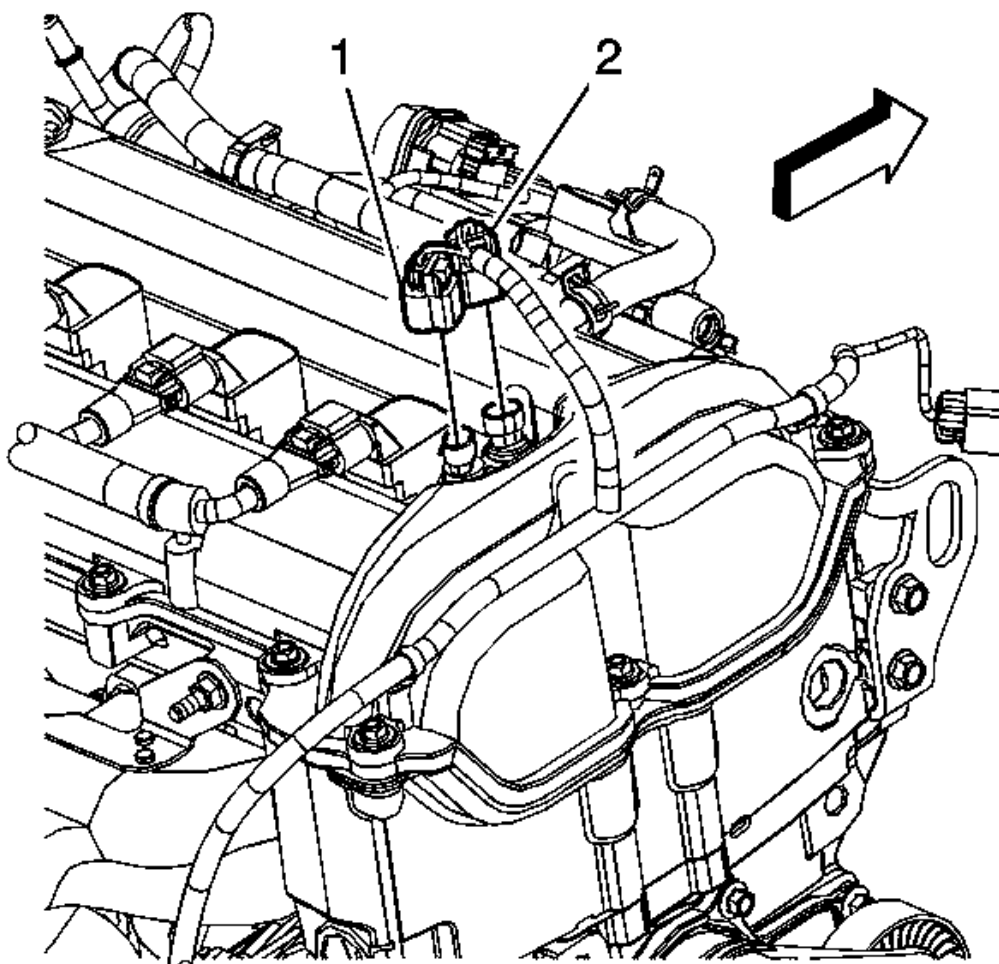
View Of Camshaft Position (CMP) Actuator Solenoid Valve Harness Connector
